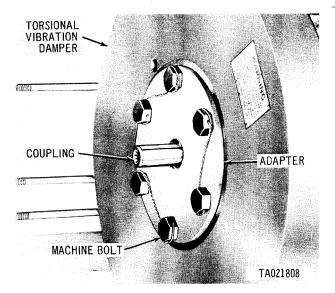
Removing or installing fuel pump drive coupling adapter and coupling model AVDS-1790-2C and AVDS-1790-2D engines.
